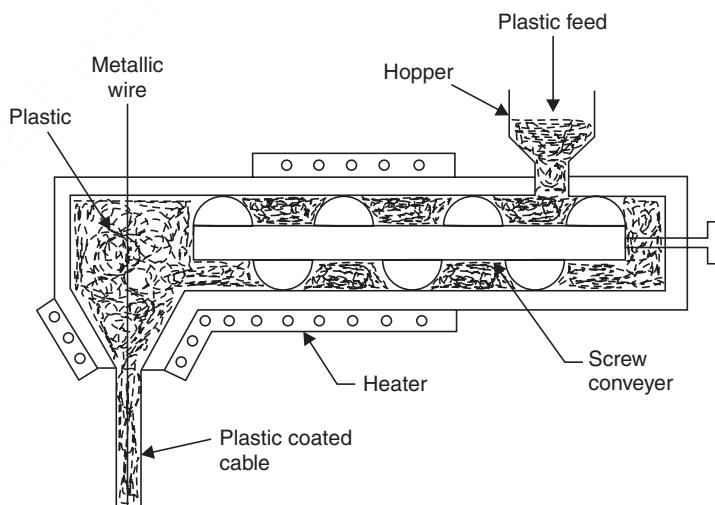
Moulding of insulated electric cable by vertical extrusion moulding.
